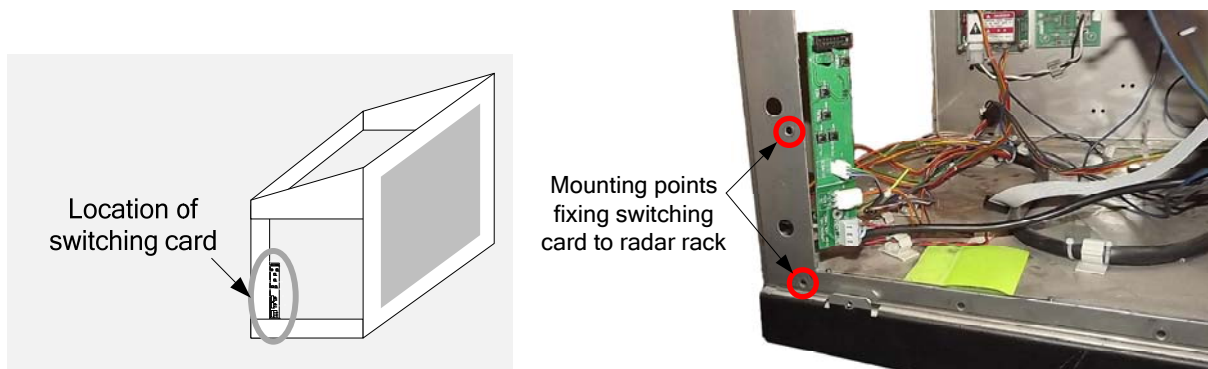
The location of switching card (on the left), general view of switching card in radar rack (on the right)
